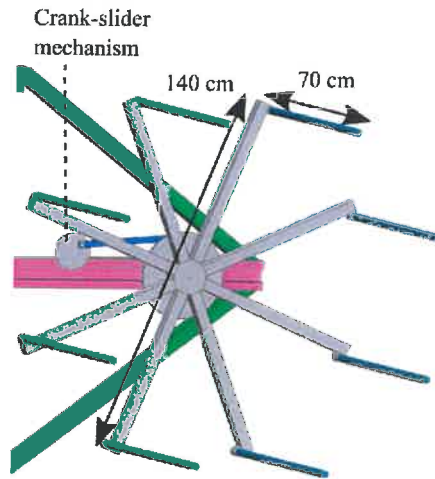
Crank--Slider mechanism is used to move the harvesting wheel back and forth (red arrow) to shake olive trees.
